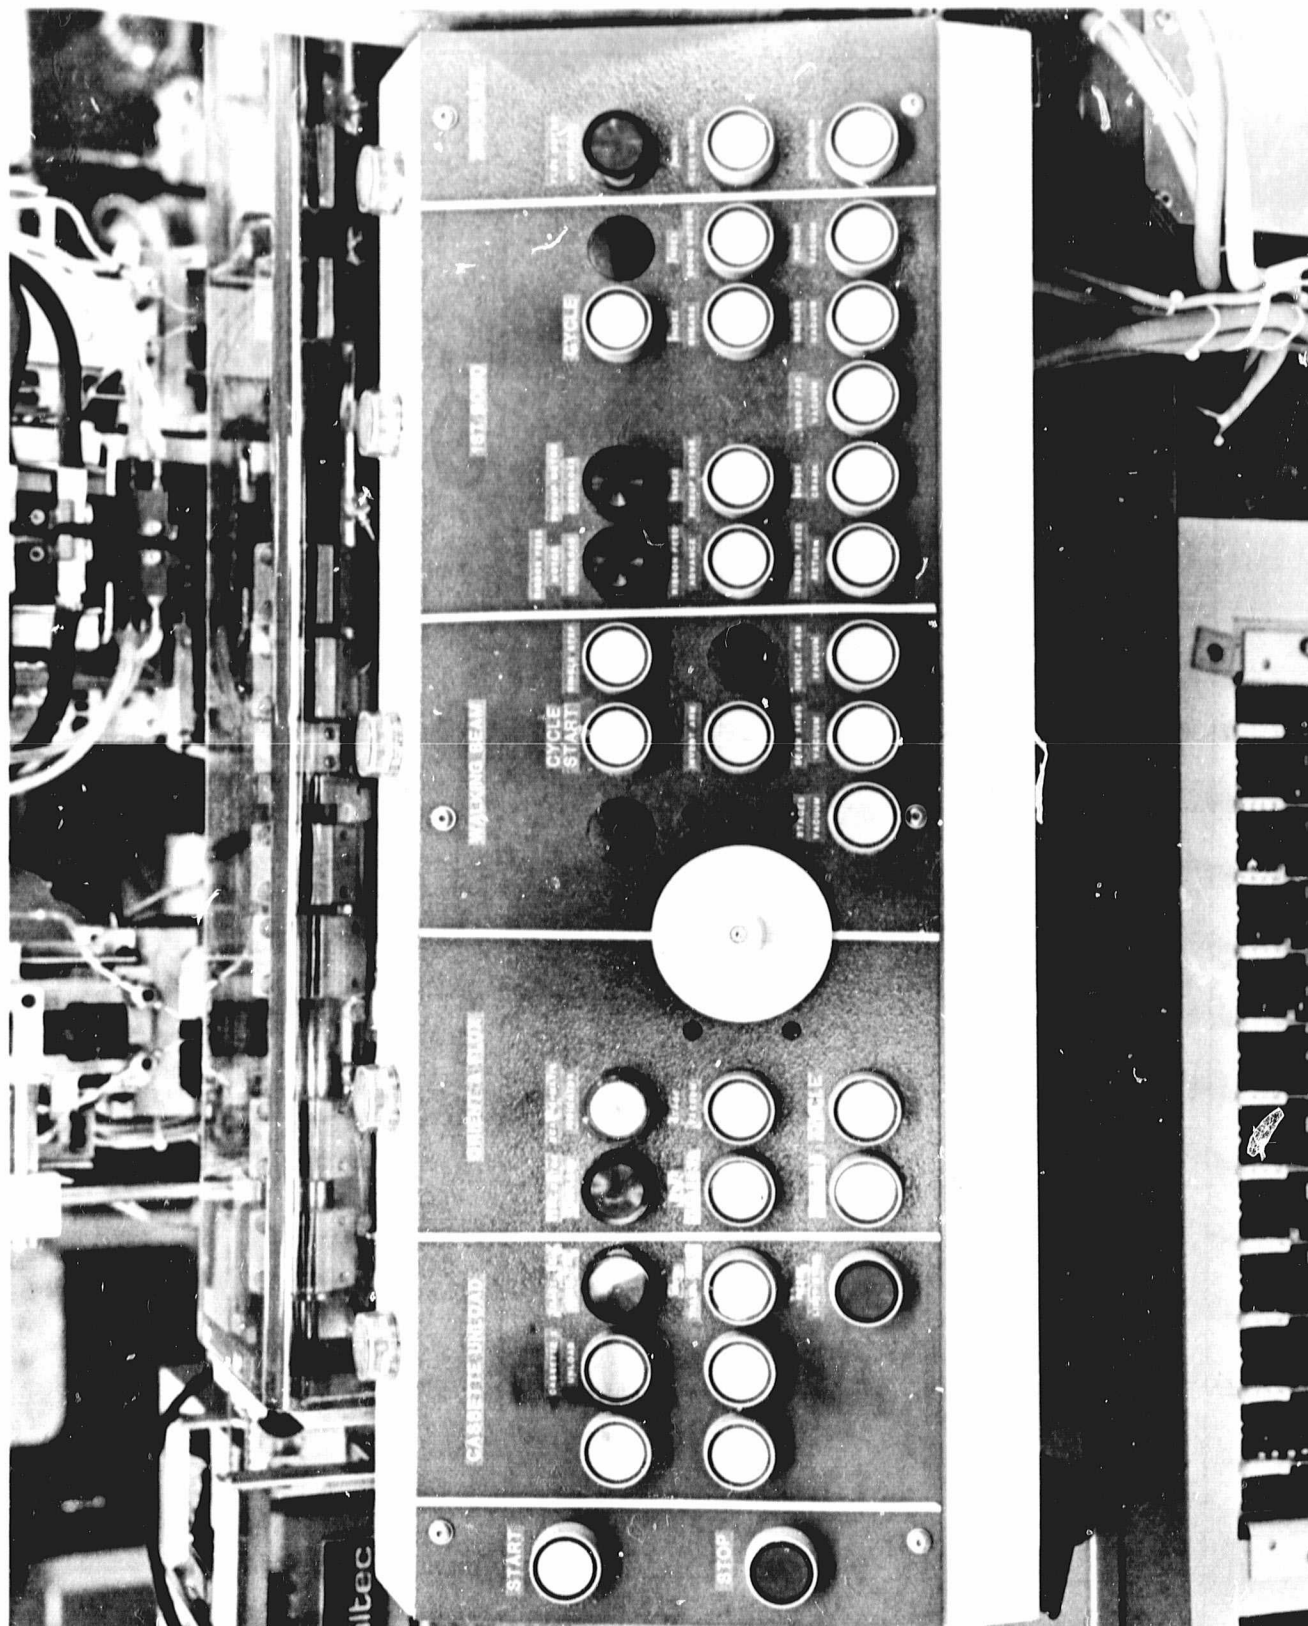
CONTROL PANEL - FIRST HALF OF MACHINE
